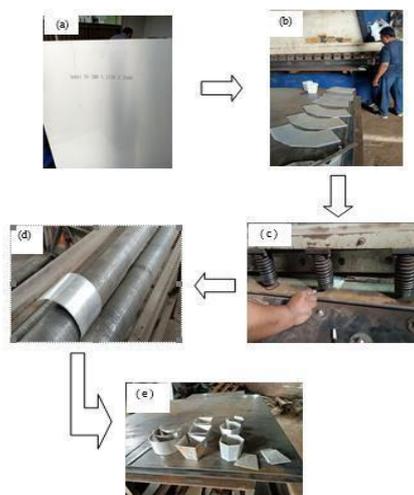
Manufacture and Experimental Work (a) plate AA 6061-T4, (b) cutting process, (c) pin process, (d) rolling process, (e) finishing process.
